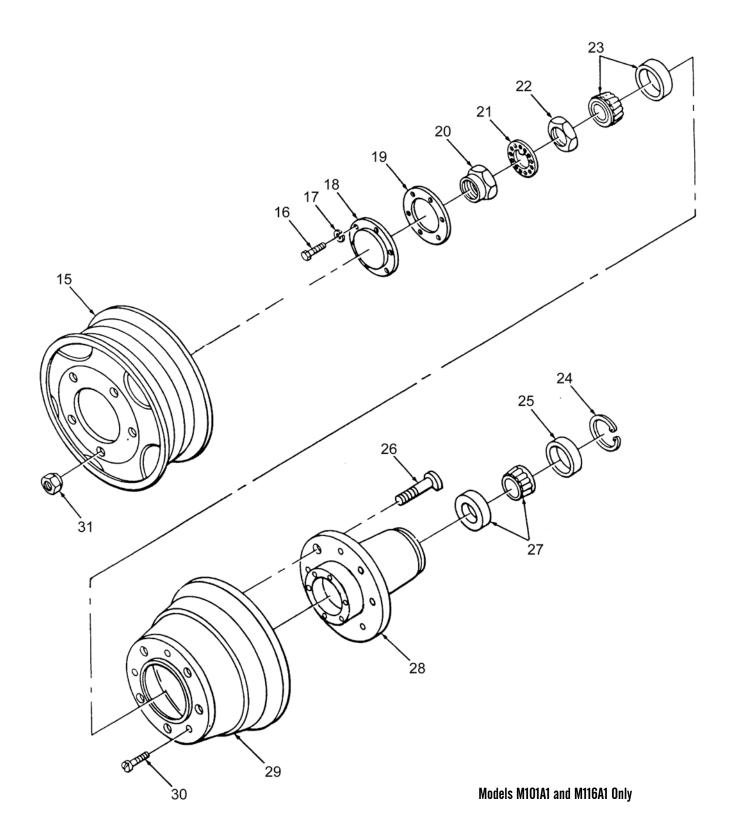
Wheel and Hub Assembly (Sheet 2 of 2)
